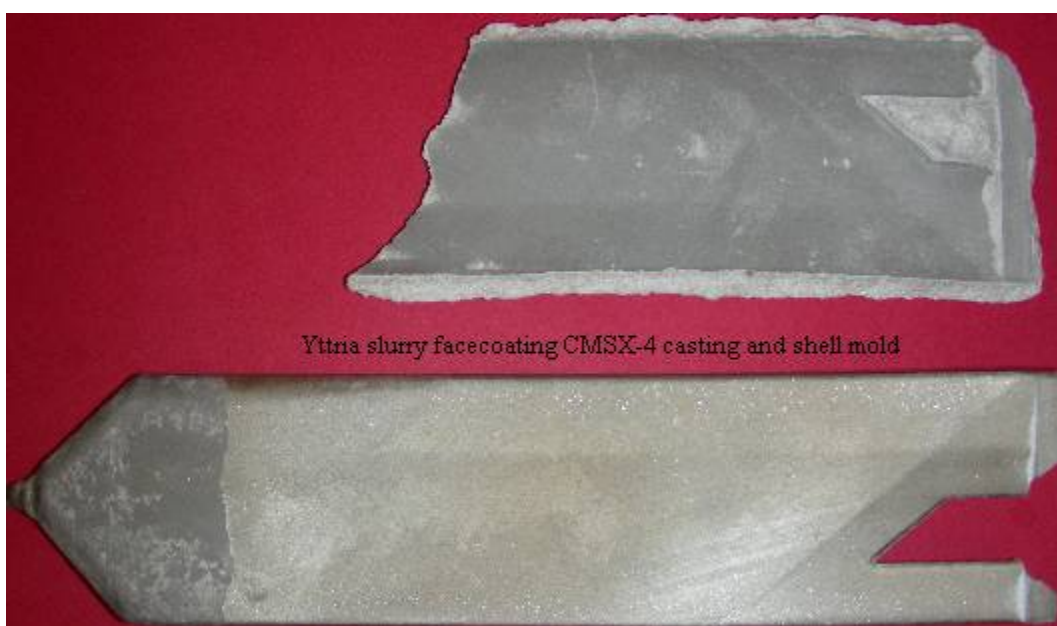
Visual appearance of CMSX-4 casting (Sample 3) and shell mold surface (Sample 9) using yttria slurry facecoat
